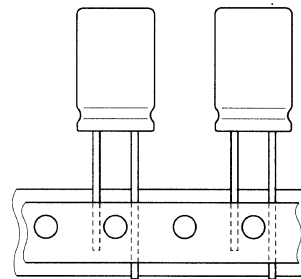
Form CB, cut leads; see Table 2 for dimensions.
